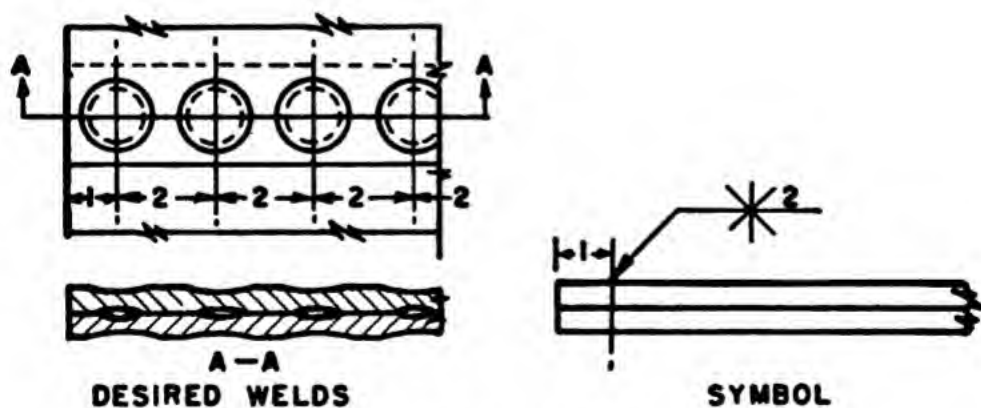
Pitch of spot welds shown on symbol.
